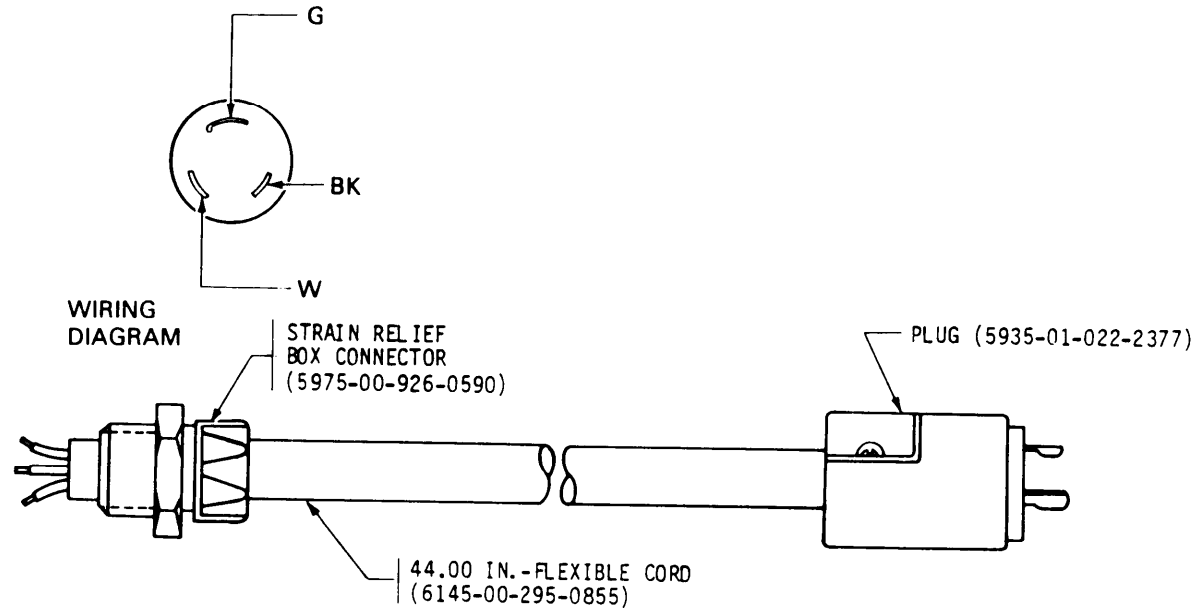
Power Cable Assembly, 11021164, Unit 1, M35A2.
